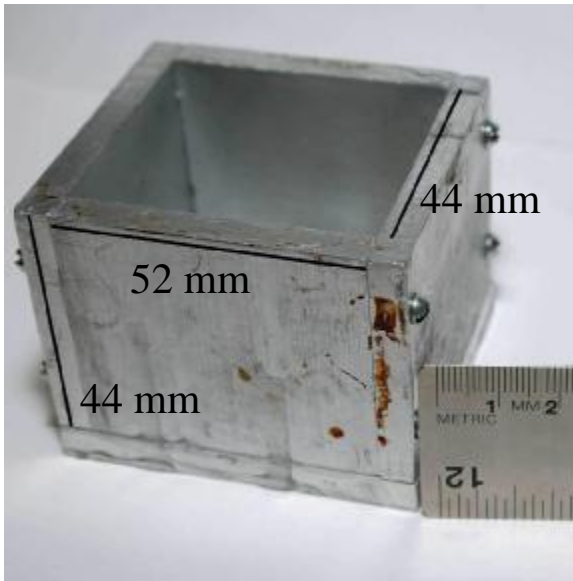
Finalized mold with dimensions employed in the production of the model hybrid.
